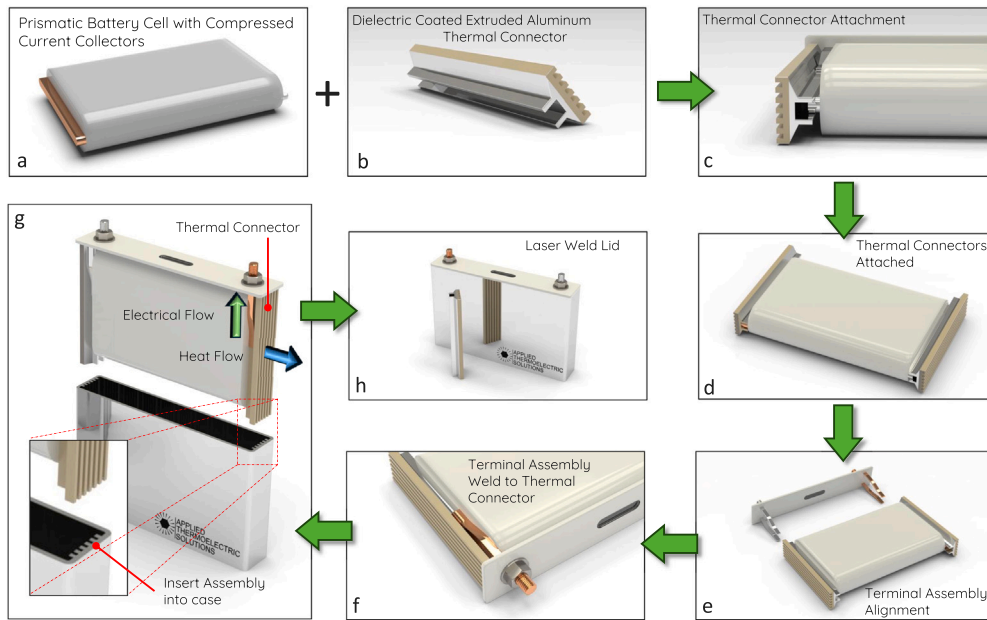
HHT battery design elements and assembly steps (a) Prismatic battery cell with compressed and trimmed current collectors (b) Extruded aluminum “thermal connector” with dielectric coating (c) Thermal connectors ultrasonically or laser welded compressed current collectors close up view (d) Both thermal connectors attached (e) Electrical terminal assembly alignment (f) Ultrasonic weld terminal assembly to thermal connector non-coated portion (g) Lower cell, thermal and electrical assembly into case (h) Laser weld lid to case.
